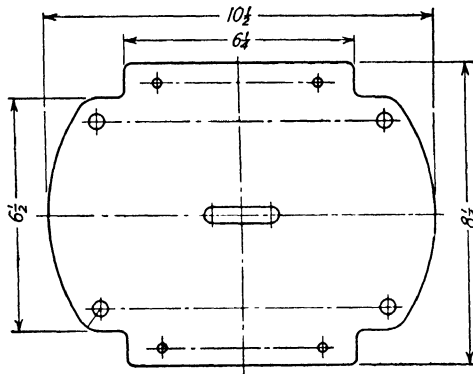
Steel blank produced in the single-station compound die illustrated in Fig. 35.
